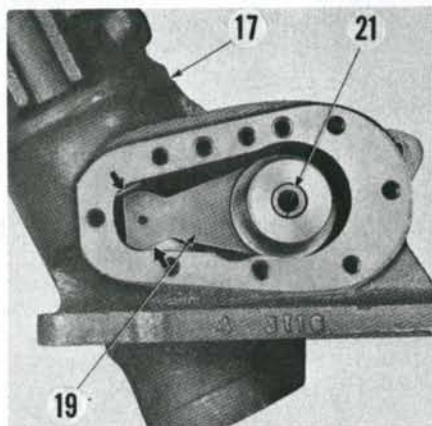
Rocker shaft can be withdrawn when arm is centered in housing openings as shown. Refer to Fig. 9 for parts identification.
